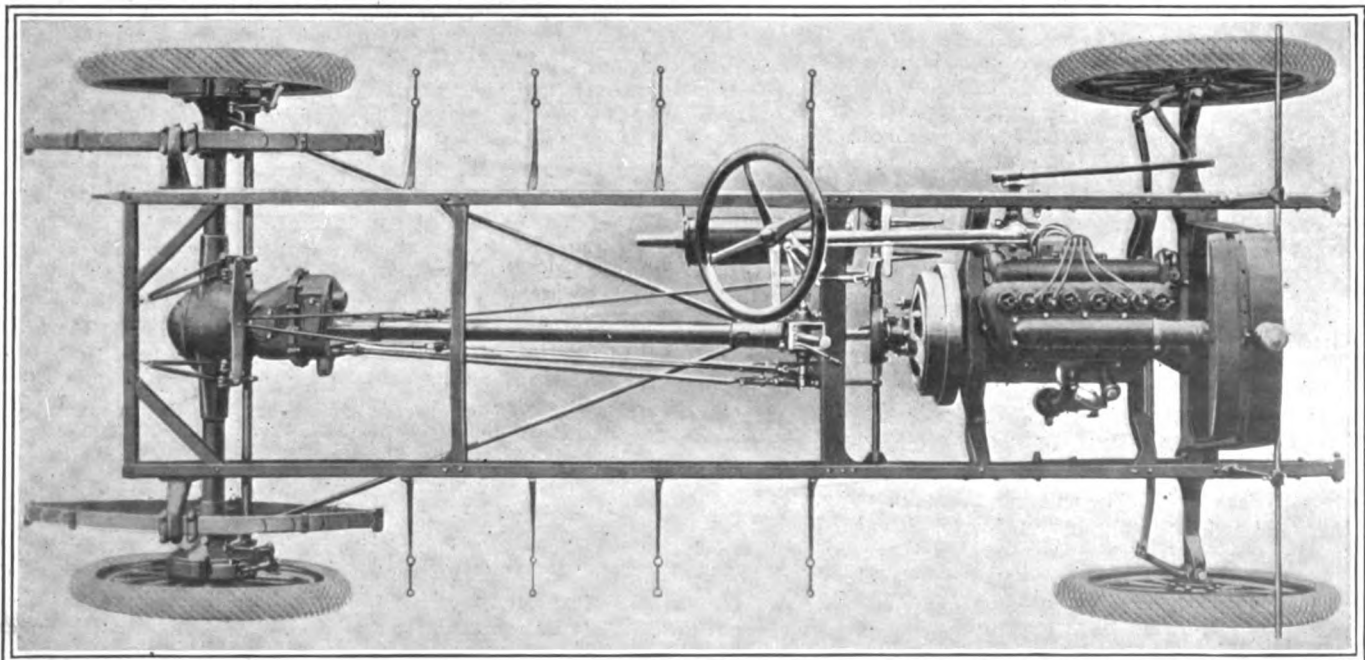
Plan view of chassis, showing motor suspension, torque arrangements and principal control features
